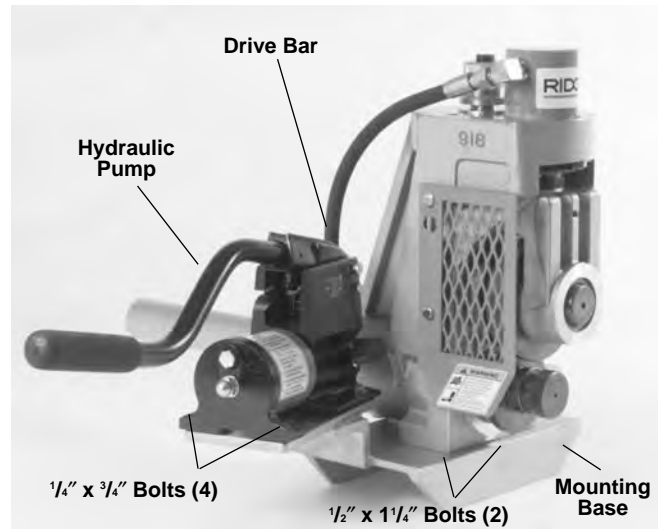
918 Roll Groover on 535 Threading Machine Mounting Base
